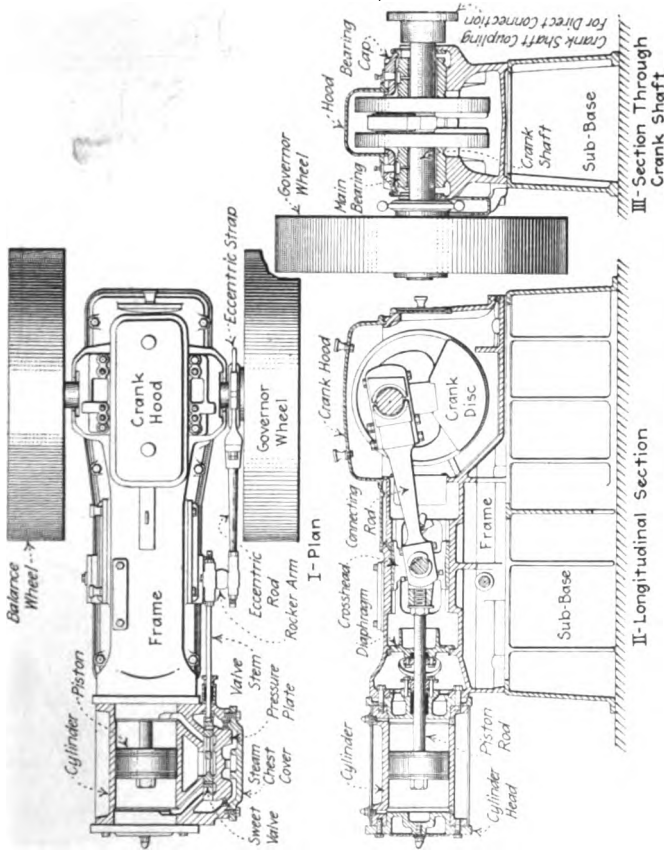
A typical high-speed, simple balanced-slide-valve engine. (Erie Ball Engine Co.)
